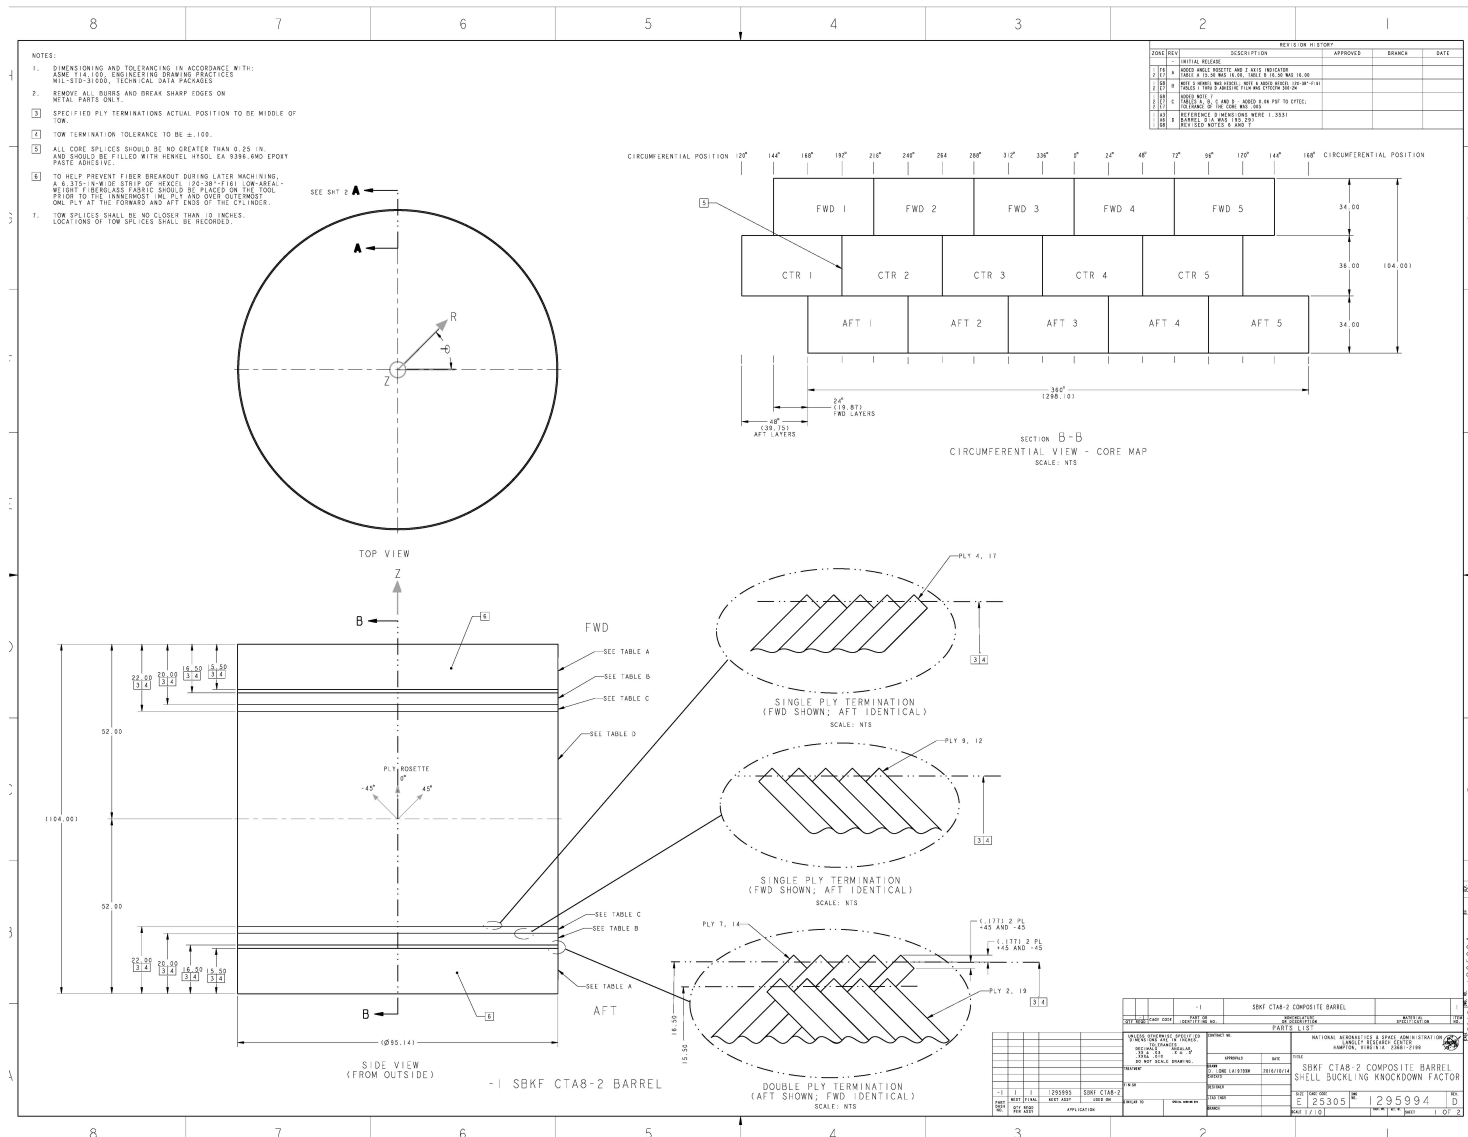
CTA8.2 fabrication drawing showing the design, LaRC drawing 1295994 Rev. D.
